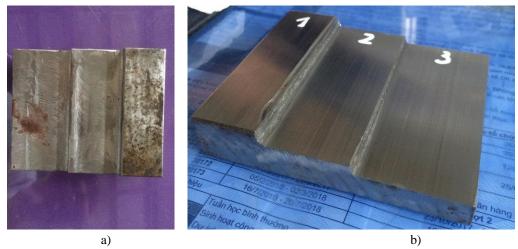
a. Surfaces before machining; b – Surfaces after automatic grinding
